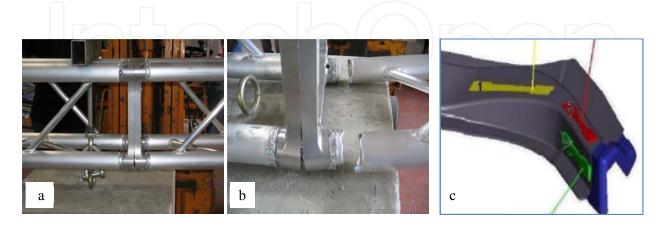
Photograph of the massive welded element: (a) position of the fracture, (b) automotive components, (c) produced by an innovative rheocasting process [86]
